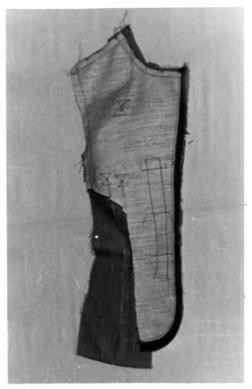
Jacket 1, Jacket 2, Inside Construction
